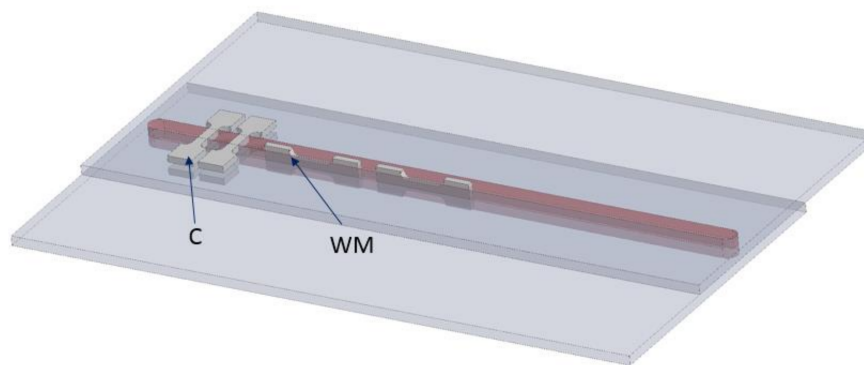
Weld configuration and sampling locations for mini-tensile specimens (C—cross, WM—weld metal).
